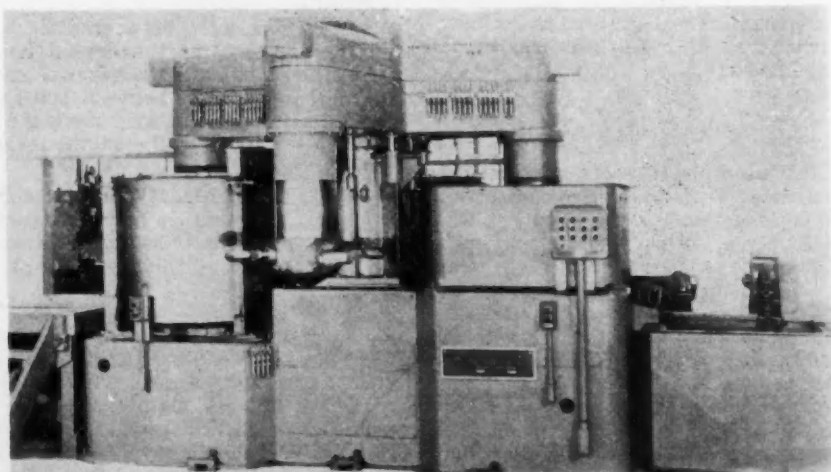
This special four-station polishing and buffing machine replaces hand operations in preparing parts for chrome plating
